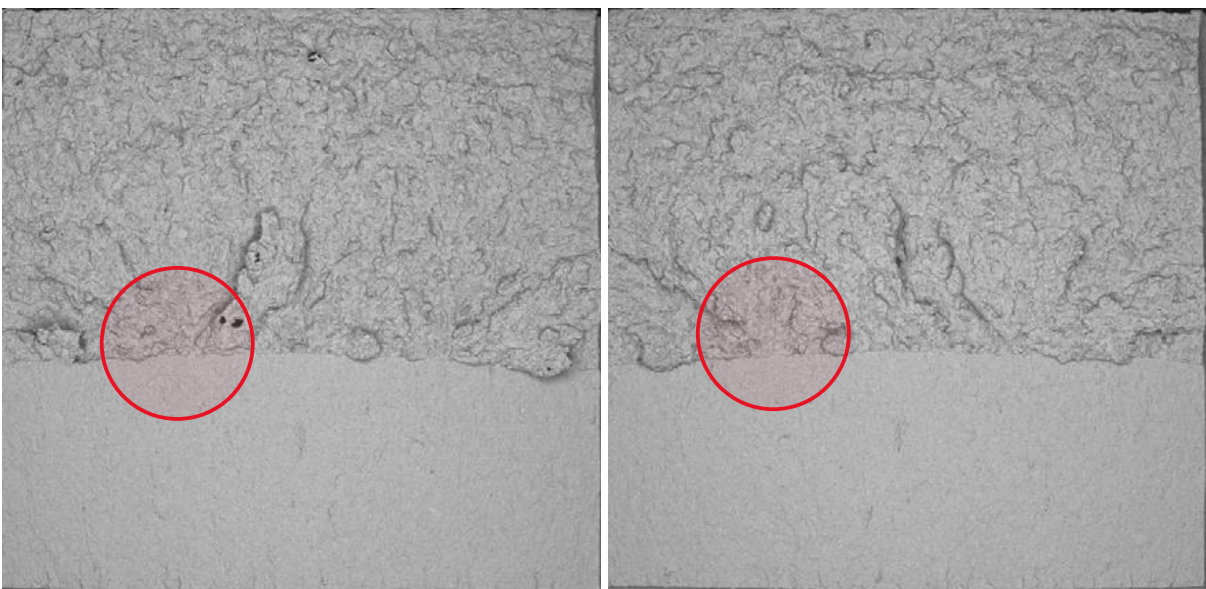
Left and right fracture surface of unirradiated SE(B) specimen B1C.9.11, showing predominantly cleavage fracture. The approximate primary cleavage fracture initiation region is marked by a red circle. The test temperature was -80°C and the fracture toughness was $84.3\text{ MPa}\sqrt{\text{m}}$. Cleavage initiation occurs in a region without special features. No finding related to inclusions are reported.
